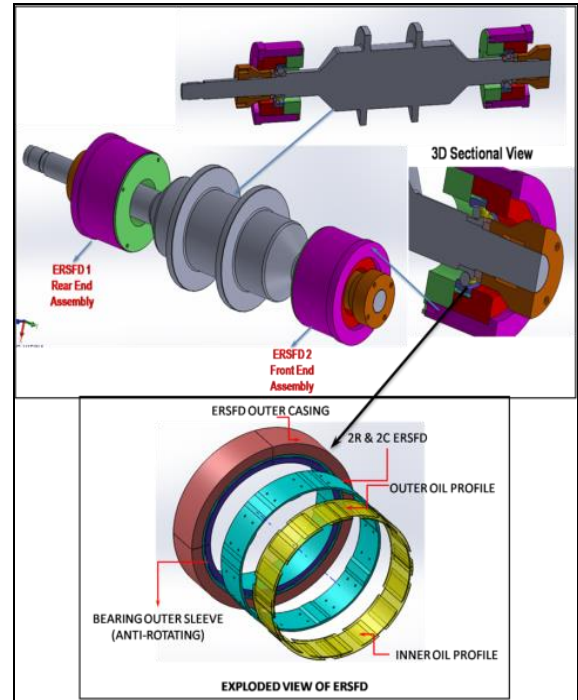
3D Model of Test Rig Engine Rotor System with an Exploded Dual ERSFD
